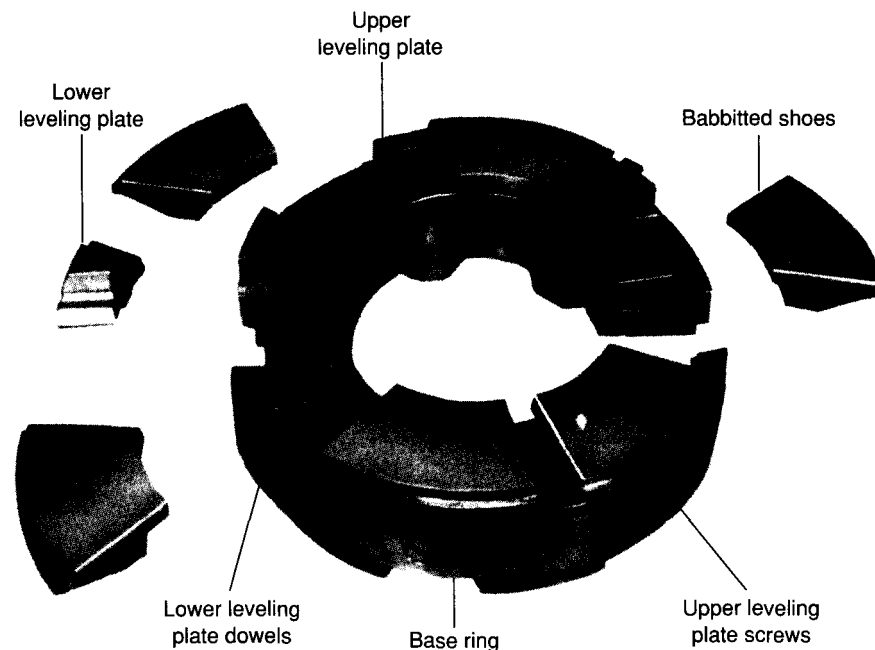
Self-aligning thrust bearing shown with component parts.
